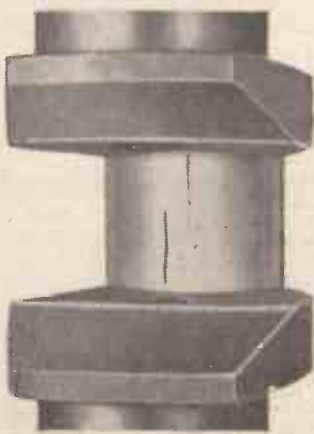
Crankshaft with cracks on bearing.
